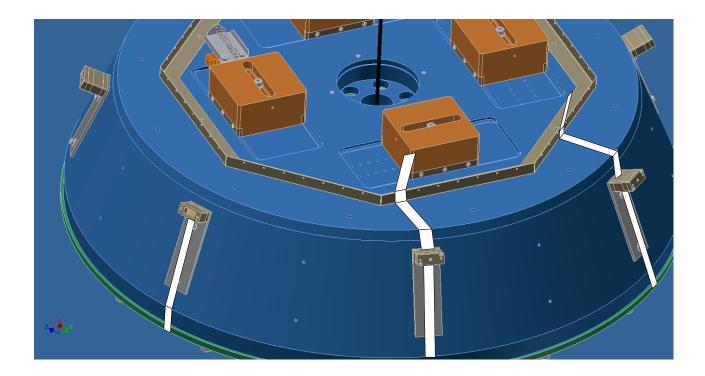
Crown of <u>connectors</u> mounted on the bottom filter. The ribbon cables coming from below end in the male connectors bolted to the lateral surface of the bottom filter. The cables coming from above (one shown as removed) are clipped to the octagonal shelf, and then fold up towards the cabling spider above. To separate the two halves of the chain, the cables are disconnected, unclipped from the shelf, and from the spider, and rolled up all the way to the standard filter above.
